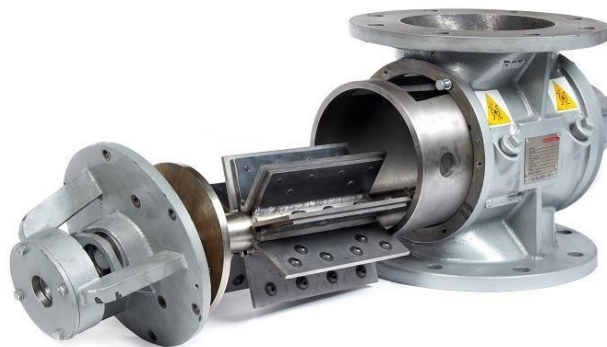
Rotary valve component assembly. It consisted of a shaft with radial vanes and a casing. [Source: <https://www.thomasnet.com/articles/pumps-valves-accessories/all-about/>]
